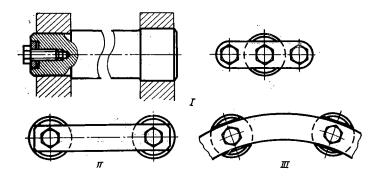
Stepped pivot pins fixed against axial and angular displacements by end plates
